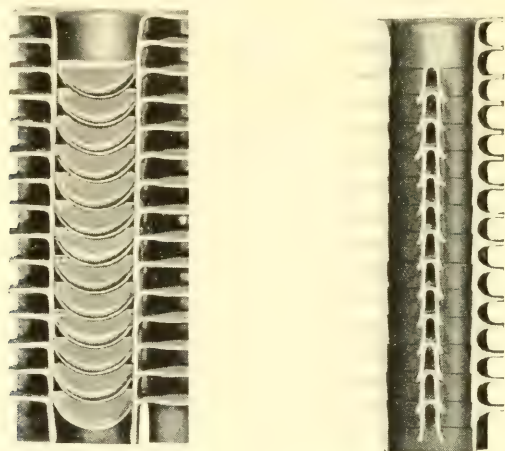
CROSS SECTION OF TUBES SHOWING INTERNAL FINIS.
